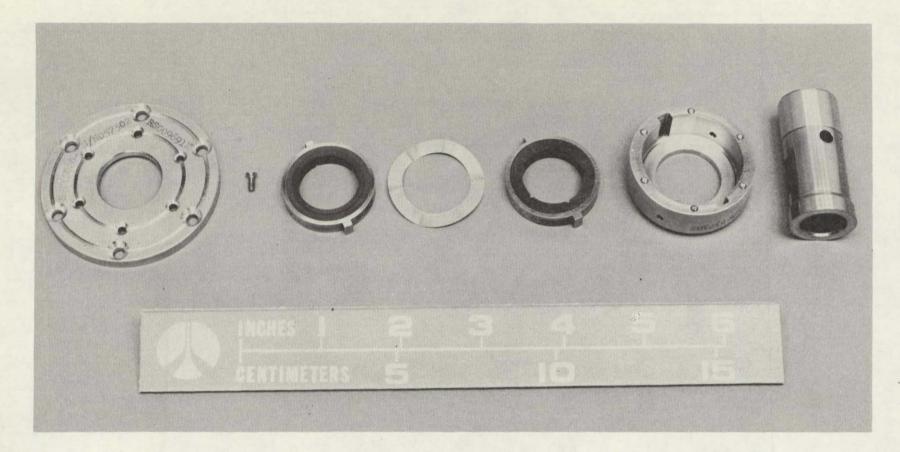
Machined Metal Bellows Lox Face Seal Assembly
